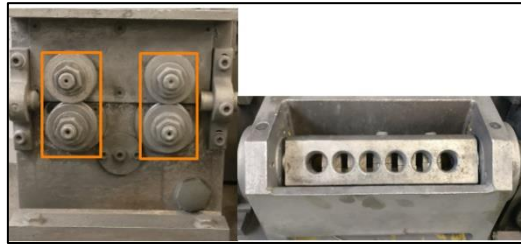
Traction wheels (left) and straightening rollers (right) of a *Dorca* machine
